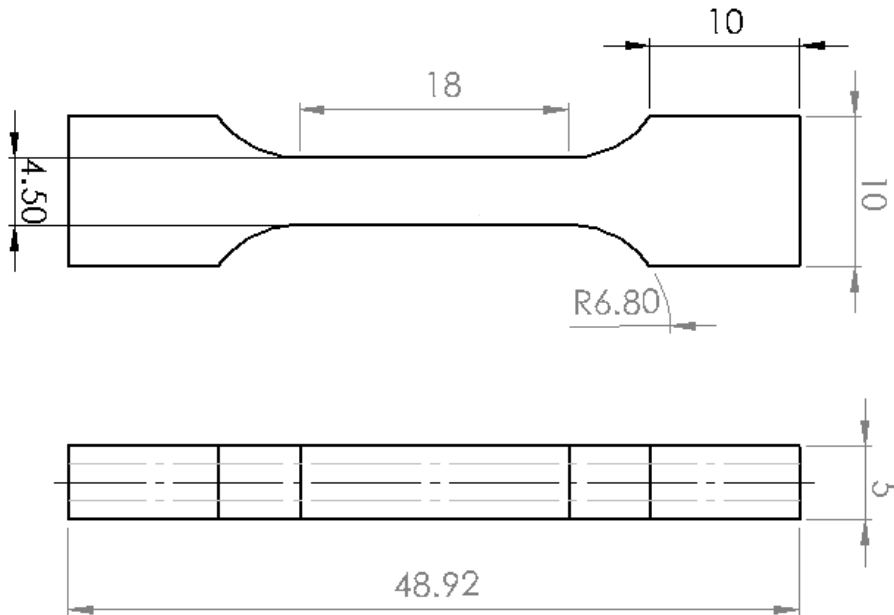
Microtensile sample dimensions as machined, with dimensions given in mm. Top layout is as machined for the 2.5 and 5mm plates. Bottom shows the through thickness slices of approximately 800  $\mu\text{m}$  thick using dashed lines. Microtensile samples are cut from the center of the plate along the flow direction.
